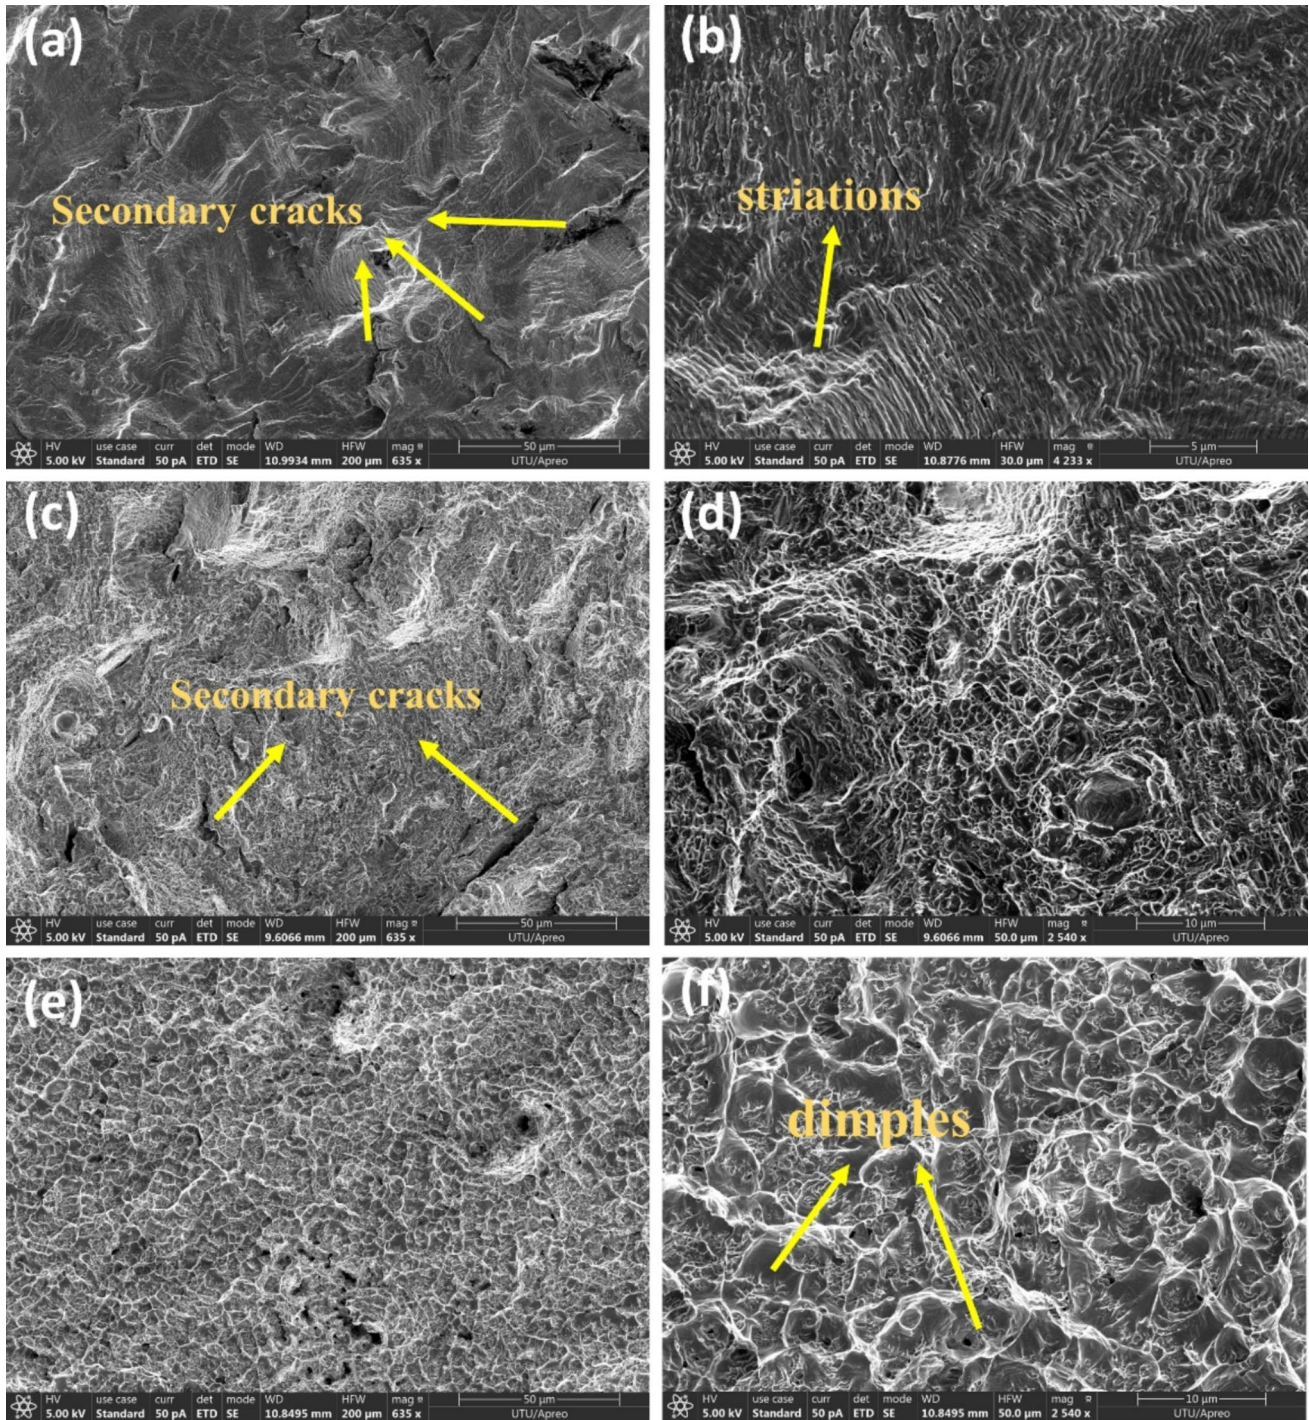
Fatigue fracture surface of a and b ABW, c and d HTW, e and f WW
